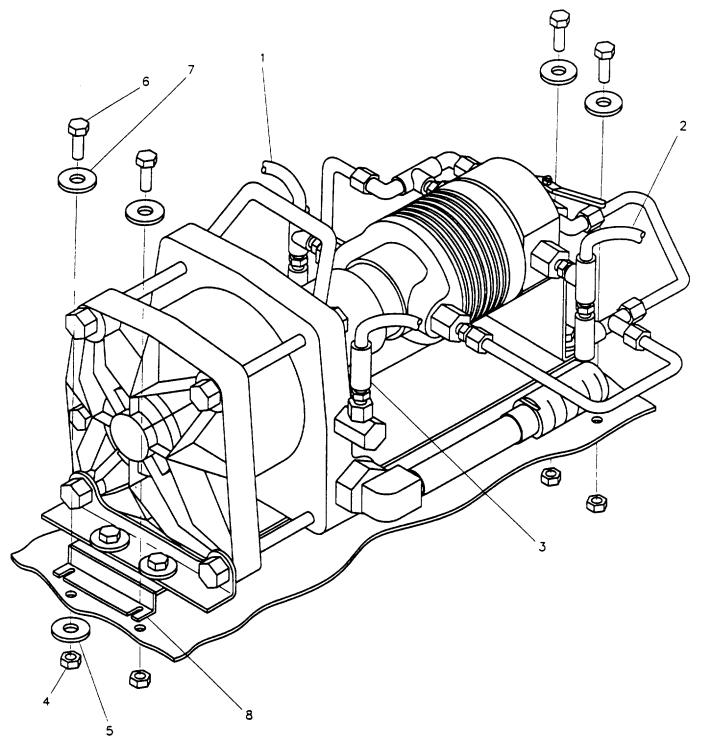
Transfer Pump Unit Replacement (Sheet 1)
